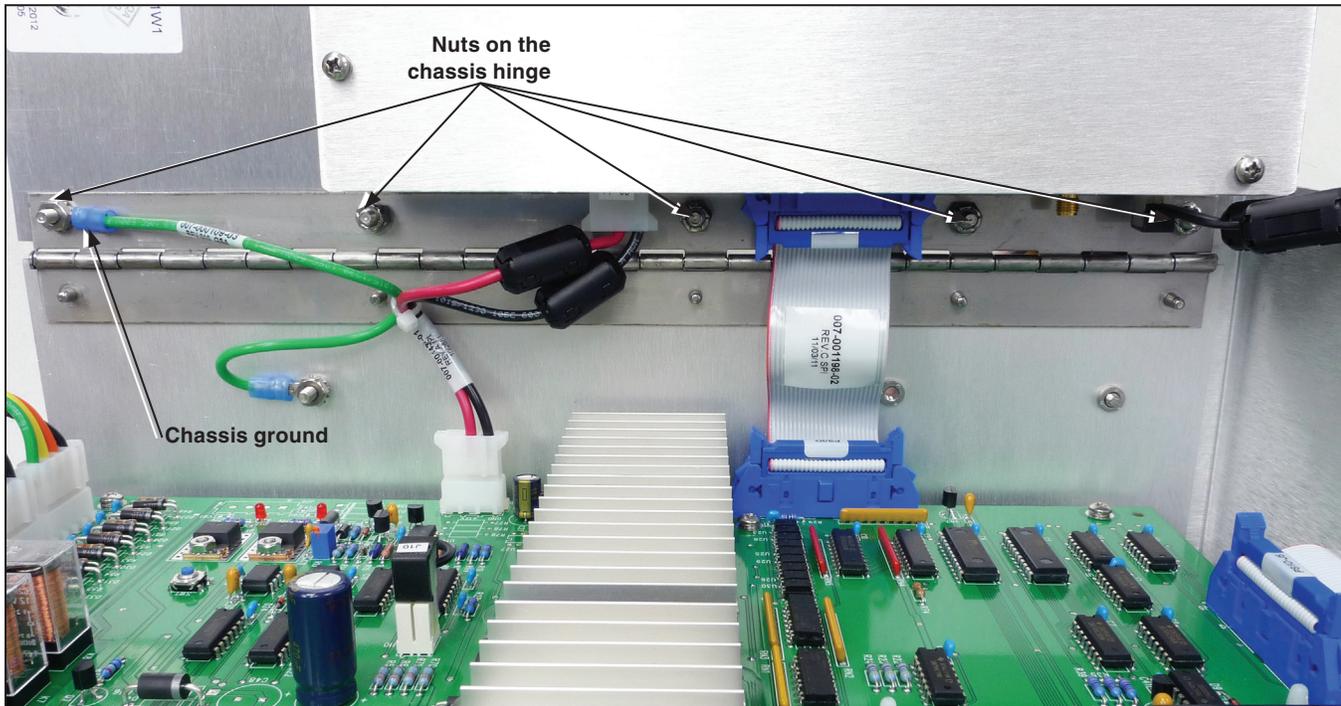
Five nuts that hold the front panel to the chassis hinge.
